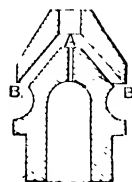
Section of Acetylene Burner giving Straight Jet Flame.
